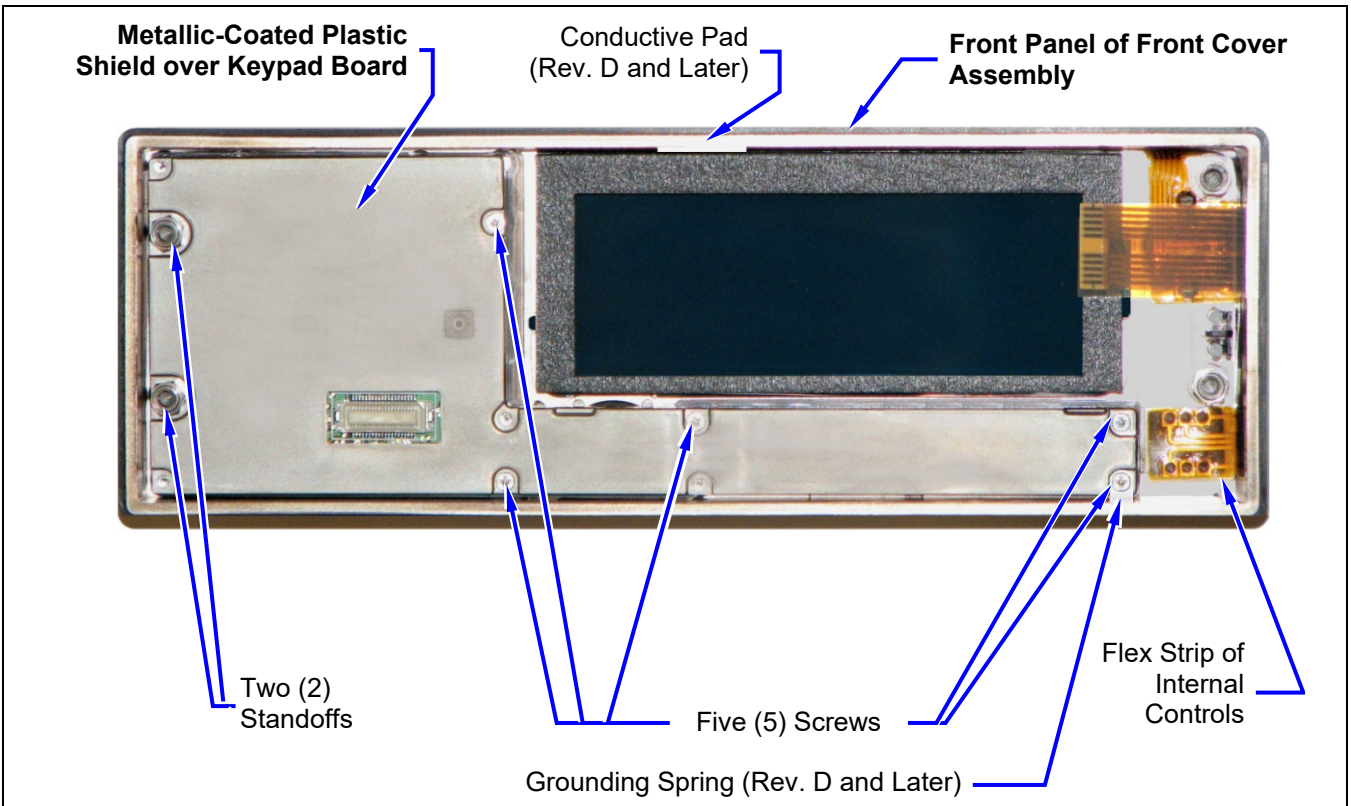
Keypad Board Shield and Related Hardware (Rear View of Front Panel)
